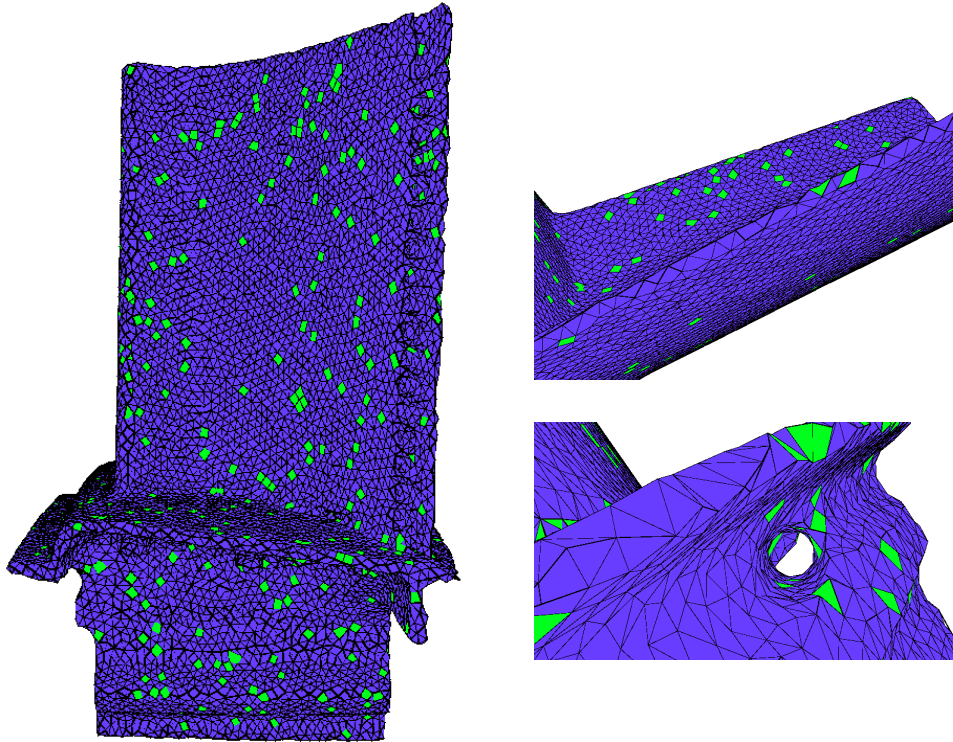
Turbine blade: full view (left), cutting edge and screw hole (right)
